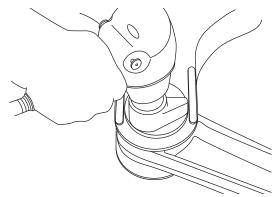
Rotate QUIK-ALIGN Eccentric Collar with Impact Gun
